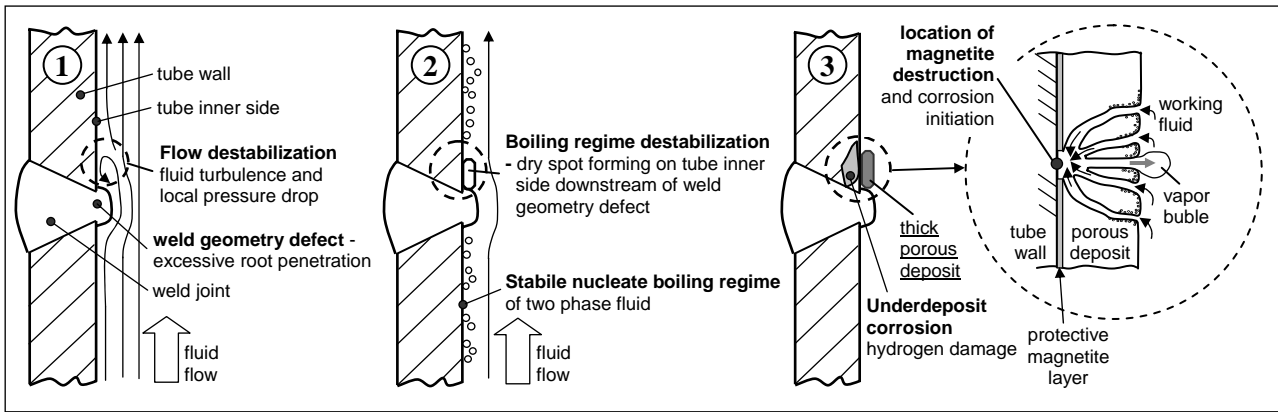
Hydrogen damage mechanism of boiler water wall tube in the vicinity of weld with excessive root penetration
